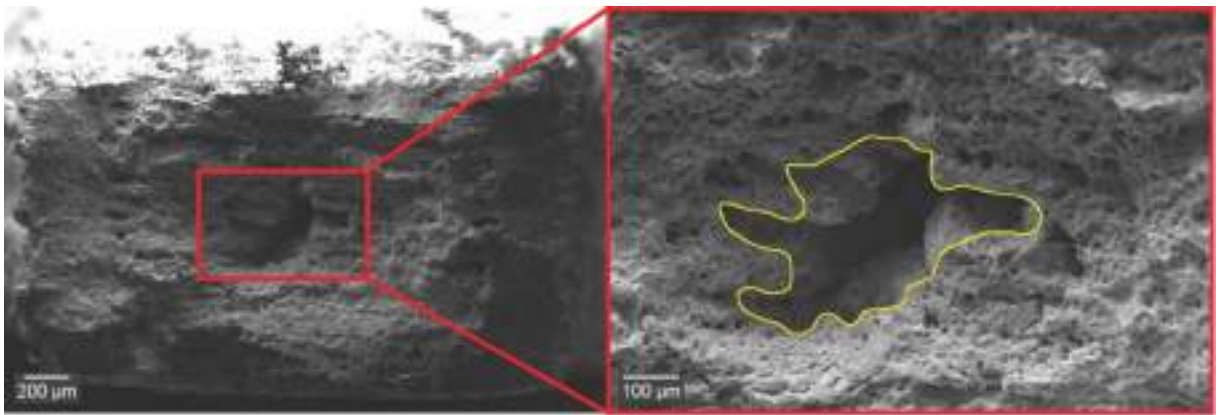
Overall fracture surface and detailed view of a smooth macro-pore (highlighted in yellow) in a cubic-infill sample.
